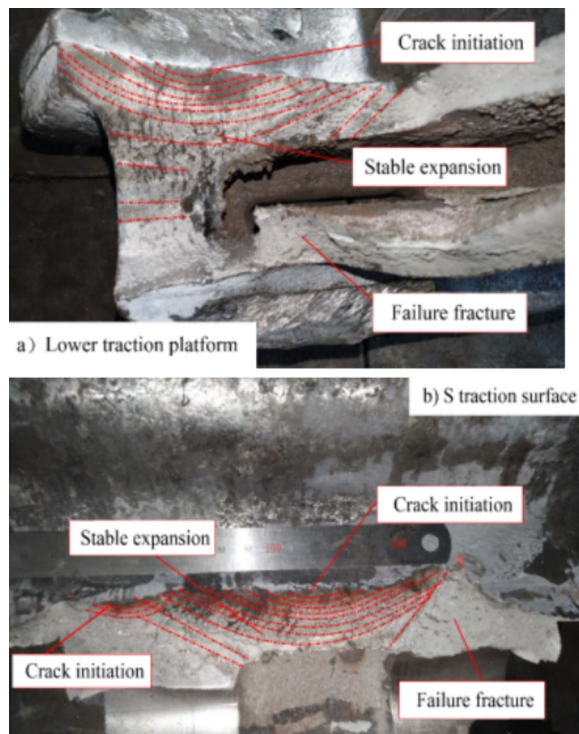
Typical fracture failure modes of fatigue crack growth in the knuckle: (a) Fracture of the lower traction platform under the knuckle (b) S traction surface under the knuckle
